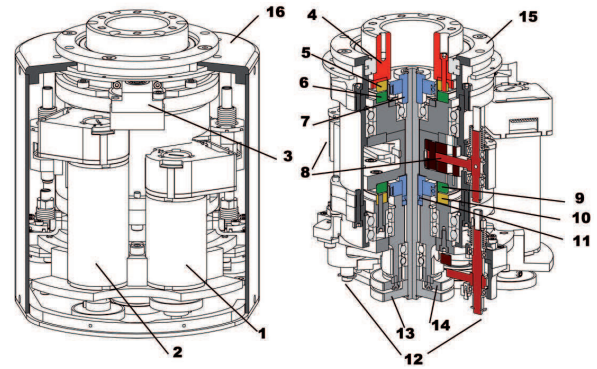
Two 3D views of VSA-HD with basic components highlighted. Left panel shows a motor side view with a 3D section of the external box, while the right one shows a 3D section.
